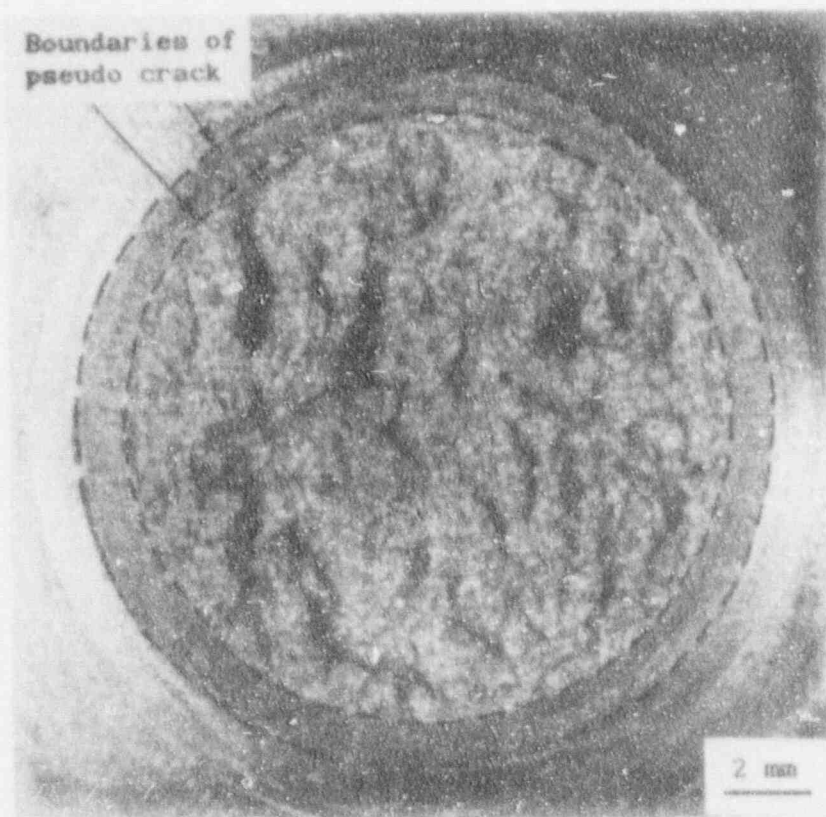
Fracture surface showing uniform depth of pseudo crack about circumference
